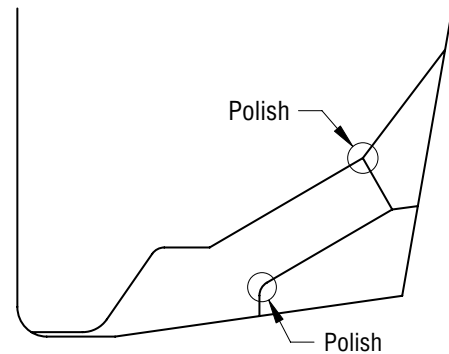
Hole polish detail of a 30° wire feed angle wedge
